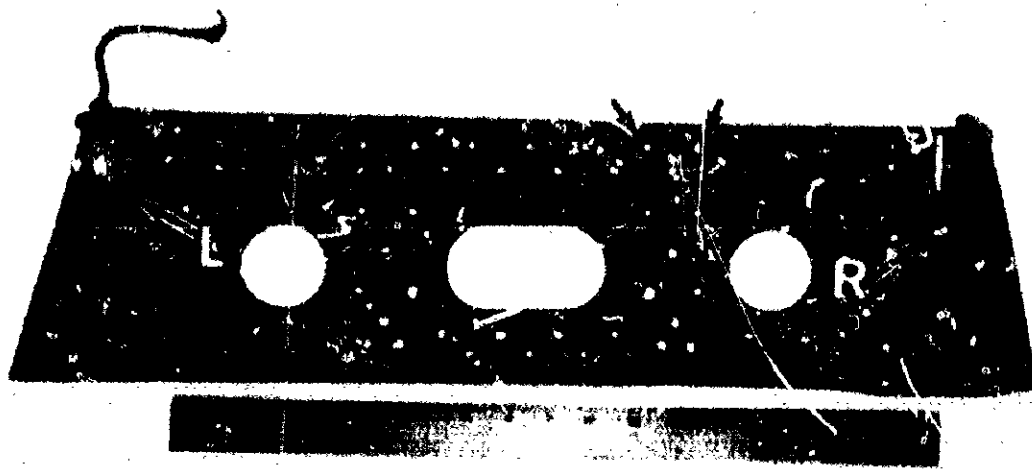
B.--Forward attachment fitting removed from bulkhead No. 33.
